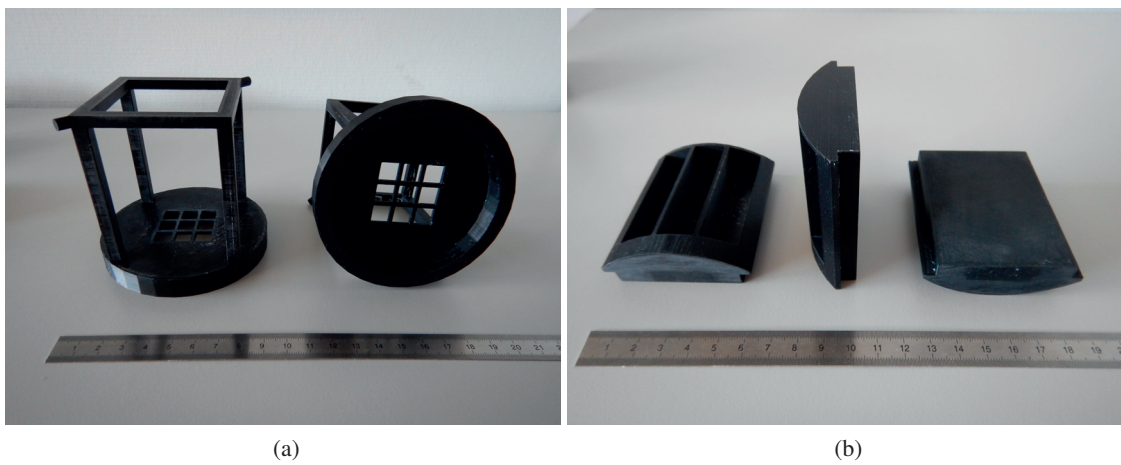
(a) Side and bottom views of the frame with its base, (b) Front, side and back views of the cylindrical segments
